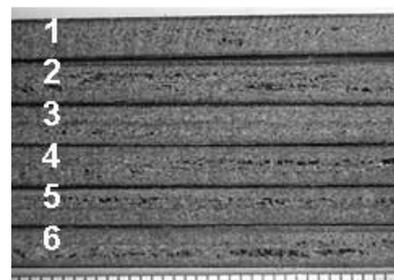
Cross Section of Cutout Specimens from the Foamed Door Module Carrier
